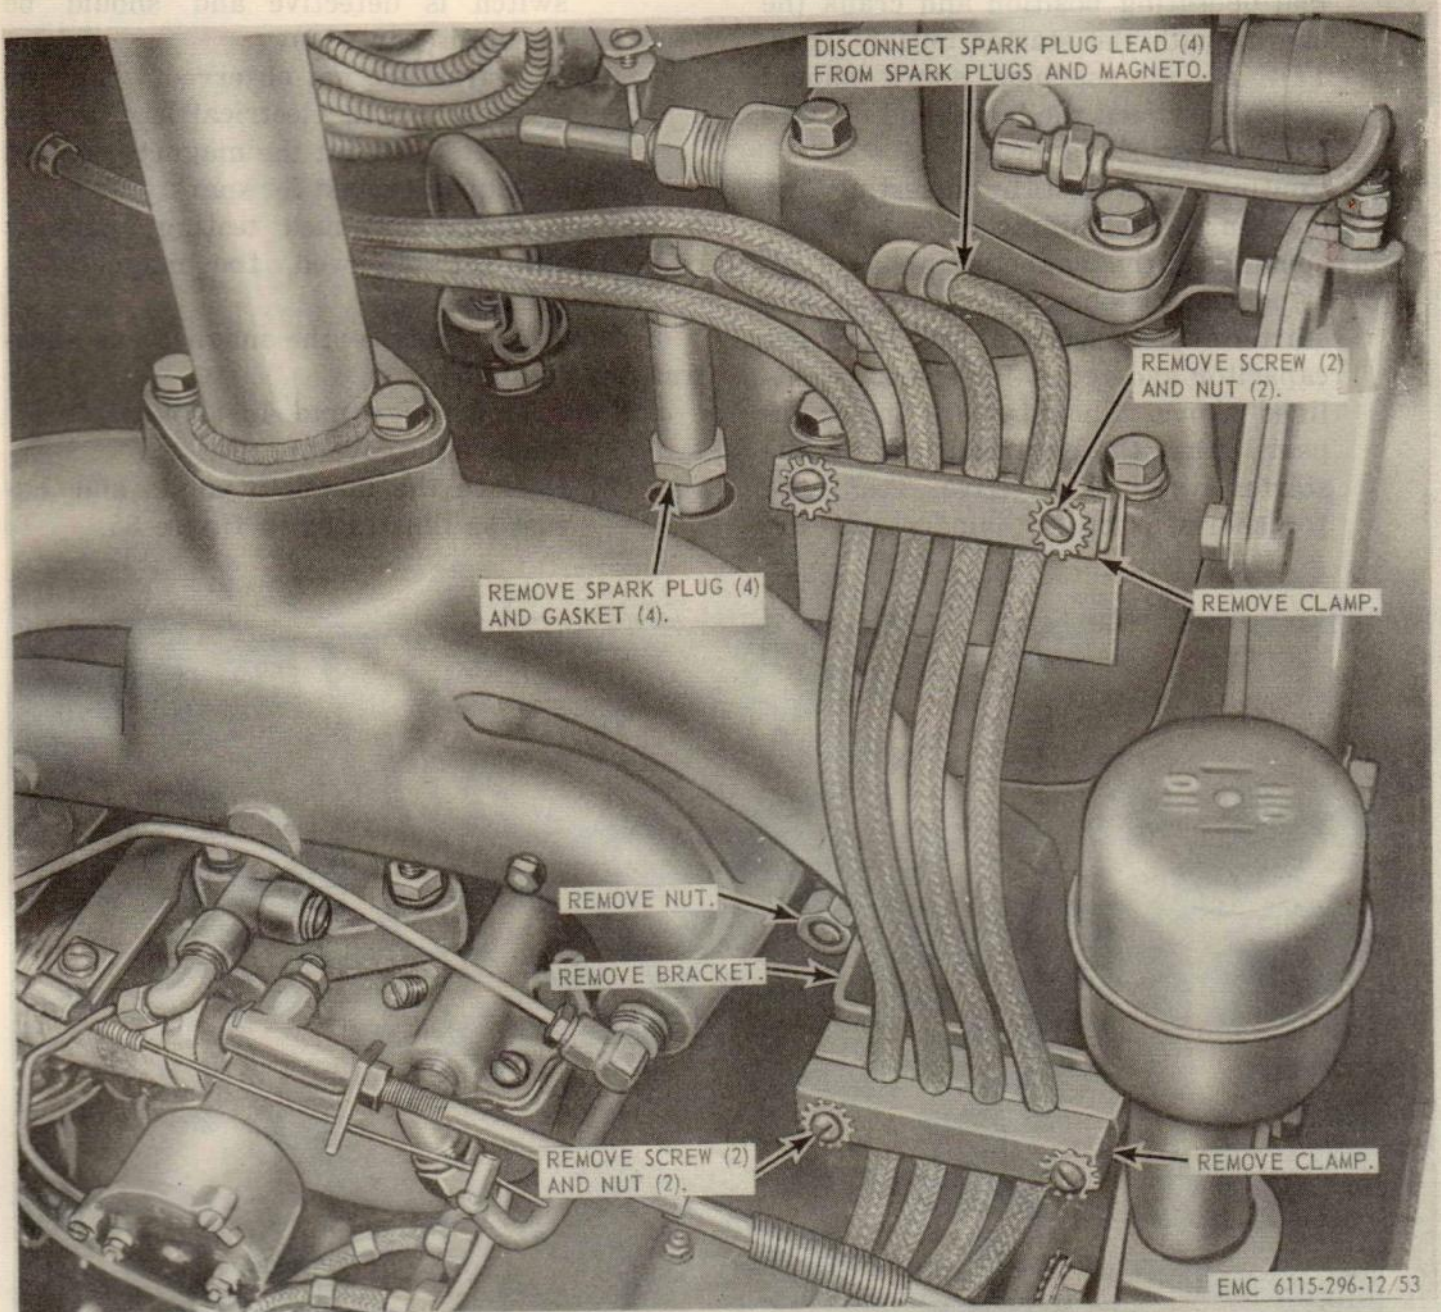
Spark plug wiring and spark plugs, removal and installation.
